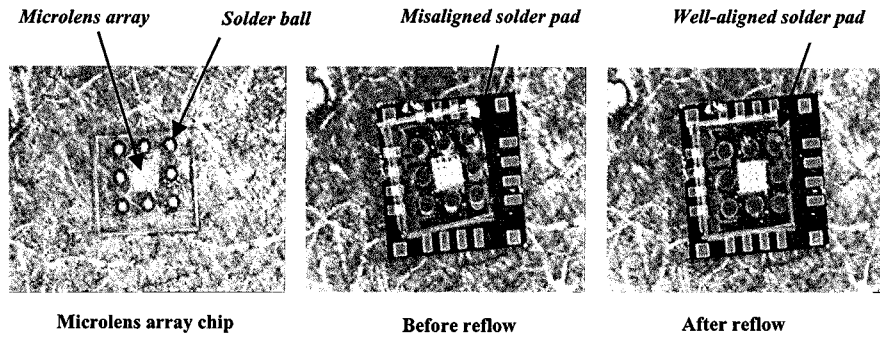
The microlens chip with solder balls before assembly, the microlens chip on top of the micromirror chip before solder reflow and after solder reflow.
